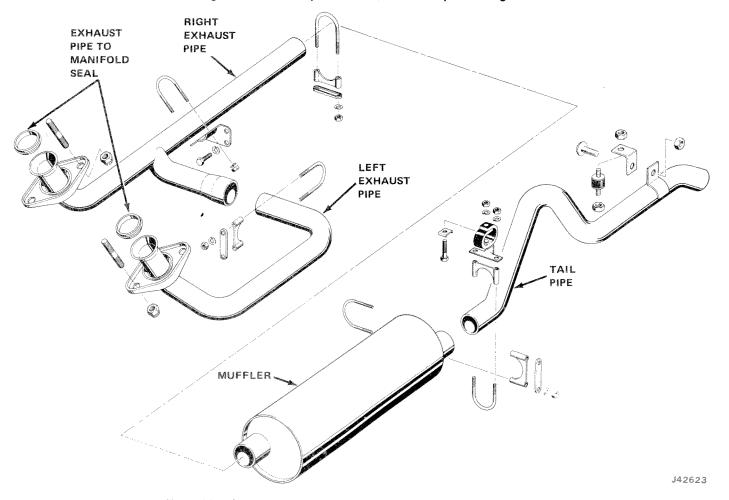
Exhaust System—Wagoneer, Cherokee, Truck—V-8 Engine
